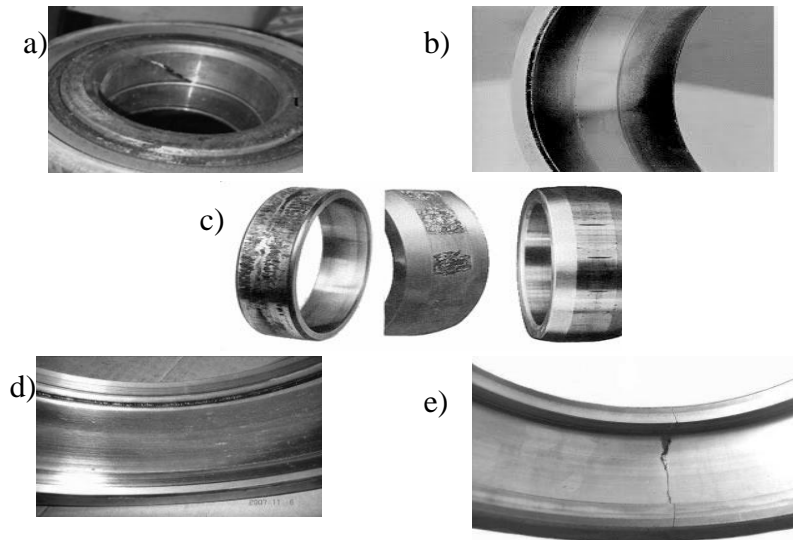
Rolling Bearing Operational Defects: a) inner clip defect; b) external clip defect; c) corrosion damage, d) contact fatigue damage, e) cracks
